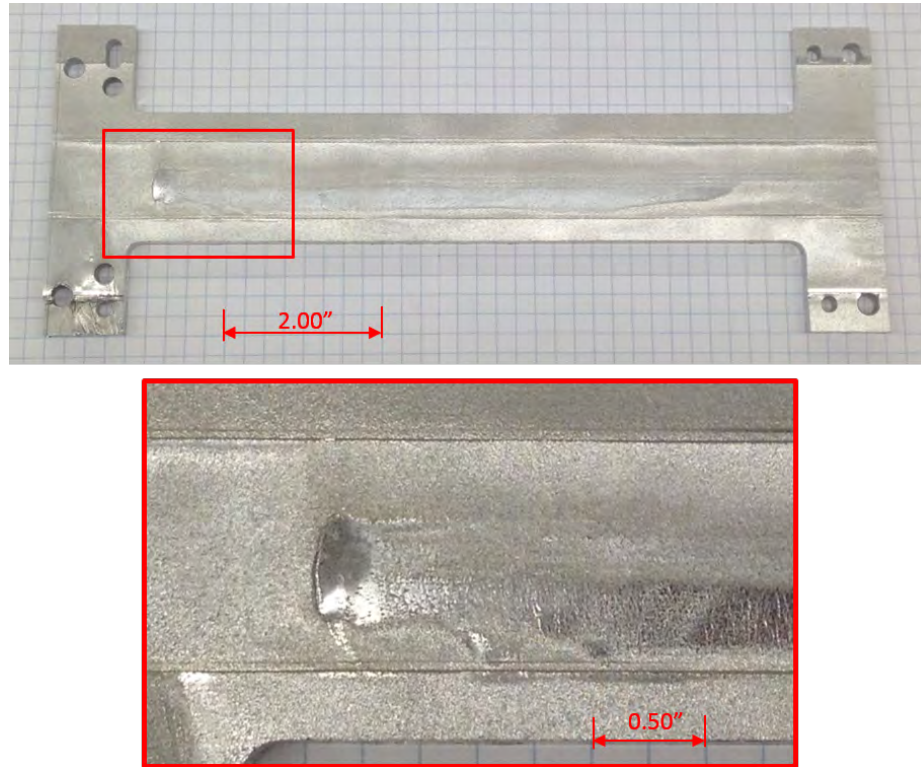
Failure of aluminum to weld to composite structure in the second large geometry sample.
